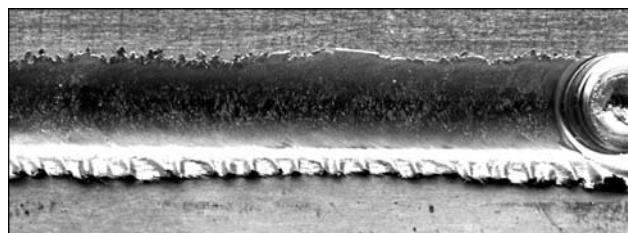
Appearance of the face of a weld produced by FSW of 1420 alloy 2 mm thick at excess height of an edge on the tool retreating side (×2)
